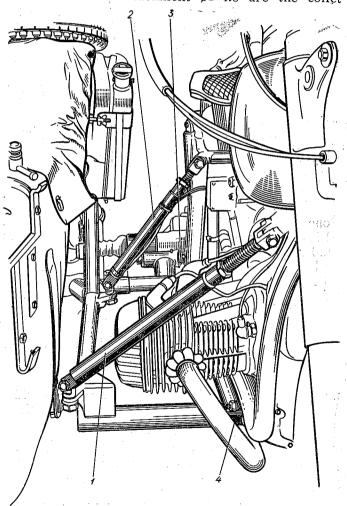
Sidecar attachment to motorcycle: 1—front tie rod; 2—middle tie rod; 3—rear collet; 4—front collet
